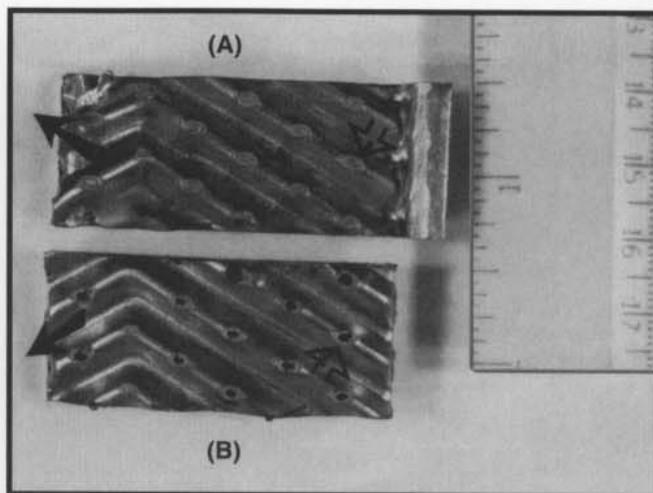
Matching parts of a torn apart piece of a heat exchanger manufactured from 316L stainless steel and brazed with the MBF-51 brazing filler metal (Ref. 8). The fracture stresses were applied perpendicular to the plate plane and in the opposite directions. Note that fracture has a mixed mode, i.e., starts in the joint fillet (A) and afterwards propagates into the base metal (B).
